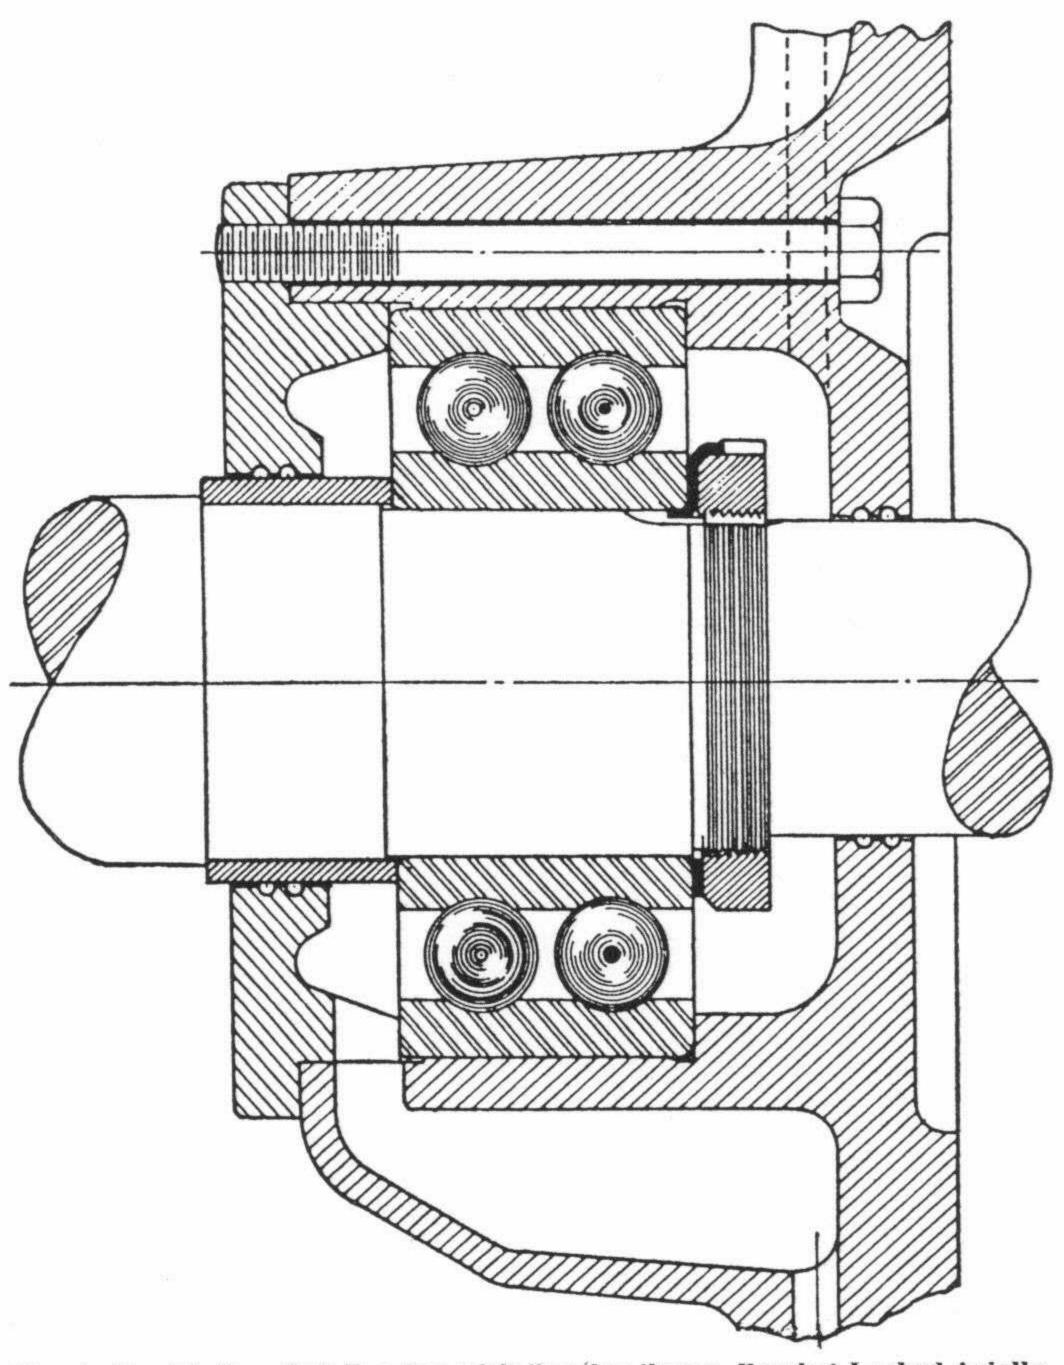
Double Row Ball Bearing with Surplus Sump. Bearing Locked Axially.
